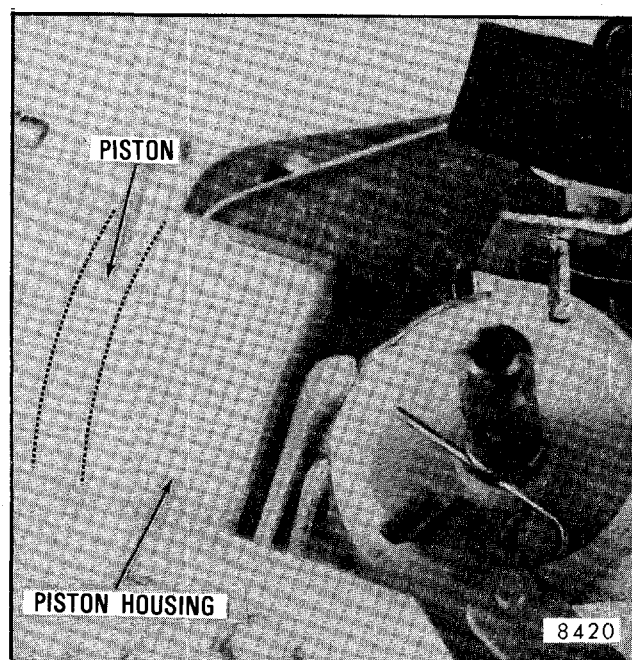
Modified Pulse and Two-Speed Round Motor Washer Assembly
